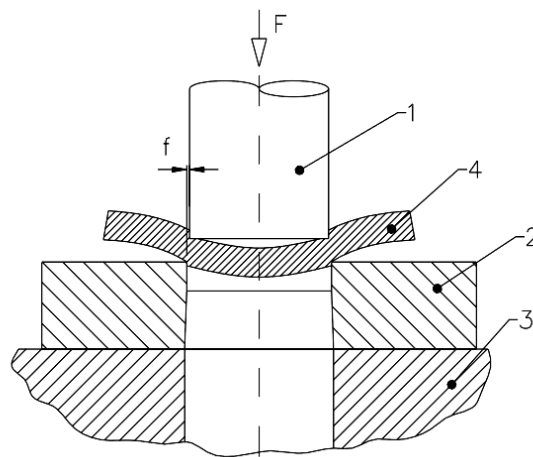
Basic elements of a die cutting tool. 1- punch, 2- matrix, 3 – tool base, 4 – sheet, f – gap between punch and matrix [9].
